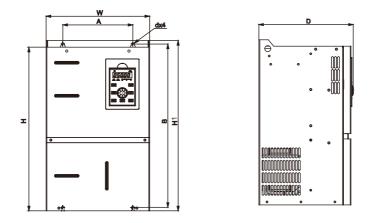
Outline and mounting dimensions of models with sheet metal structure (LS680T22GB to LS680T400G, LS680-2T11GB to LS680-2T55G)
